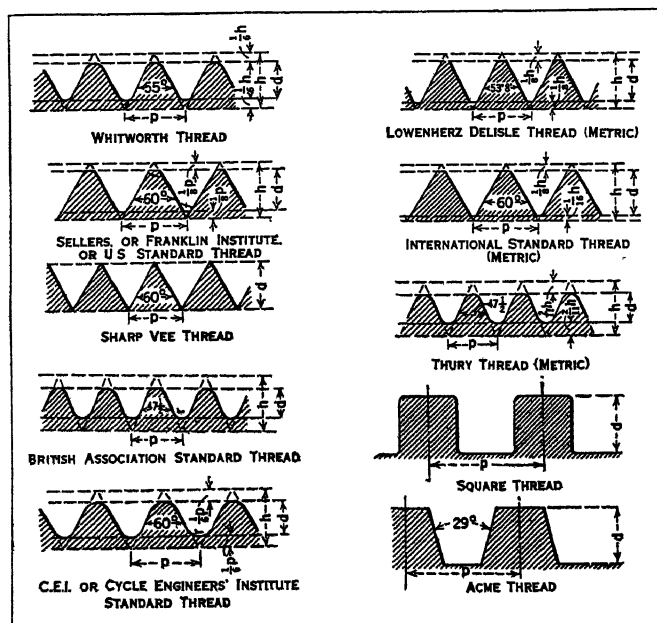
SECTIONS OF PRINCIPAL SCREW THREADS
